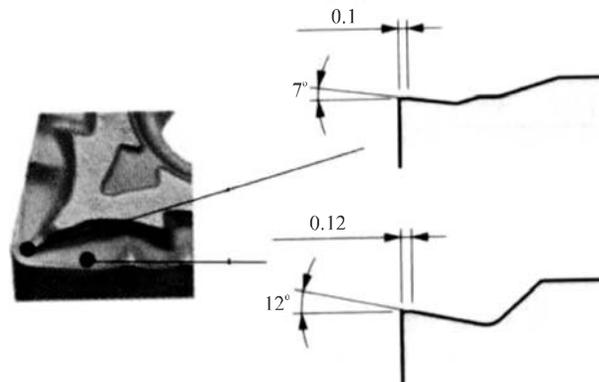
CQ TYPE INSERT CHIP BREAKER GEOMETRY
